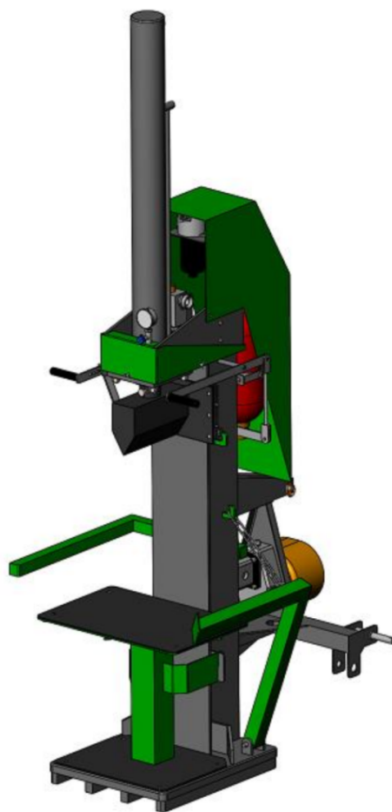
3D CAD model of hybridised firewood splitting machine [13].
